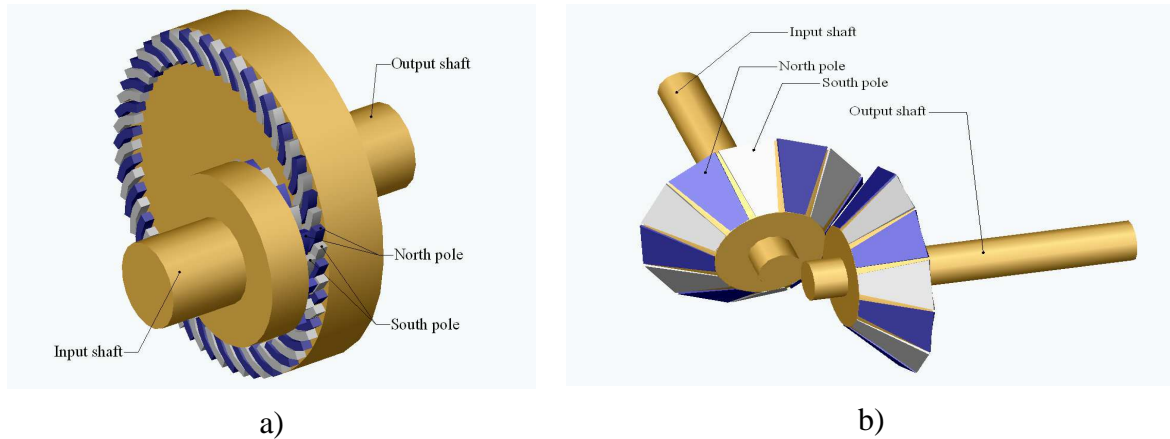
a) Magnetic gear with magnetisation directed in axial shaft direction [27]. b) Magnetic gear similar to the mechanical bevel gear [29].
